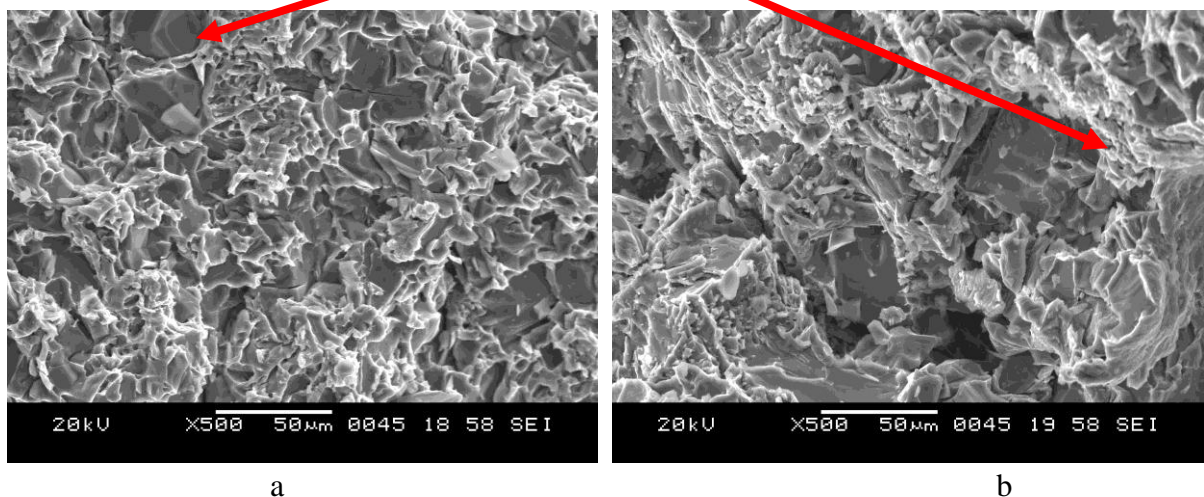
The Fractured Surfaces of the Tensile Specimens under SEM of Centrifugal castings: a) Al-12 wt % Si and b) Al-17 wt % Si Produced at 800 rpm (26.5G) of the Mold
